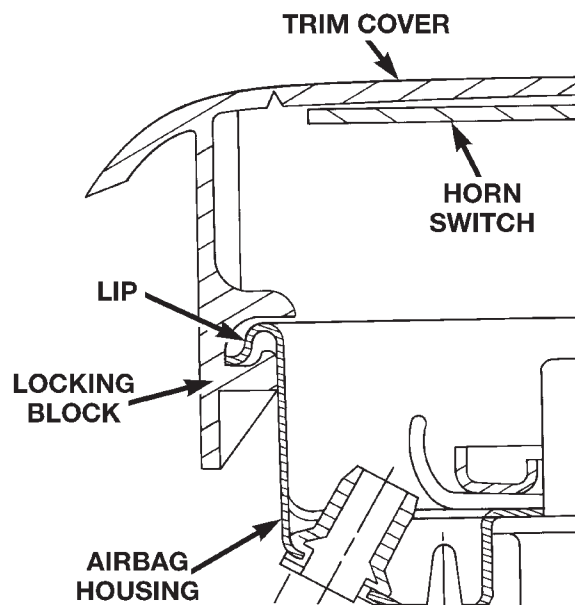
Driver Side Airbag Trim Cover Locking Blocks Engaged
